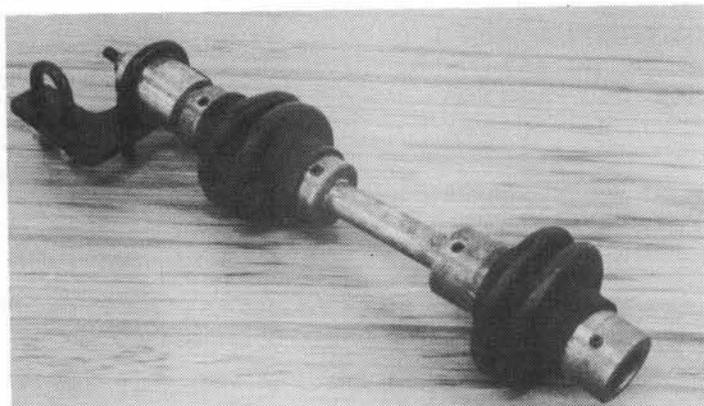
Universal-jointed shaft and pedal-crank attachment bracket
